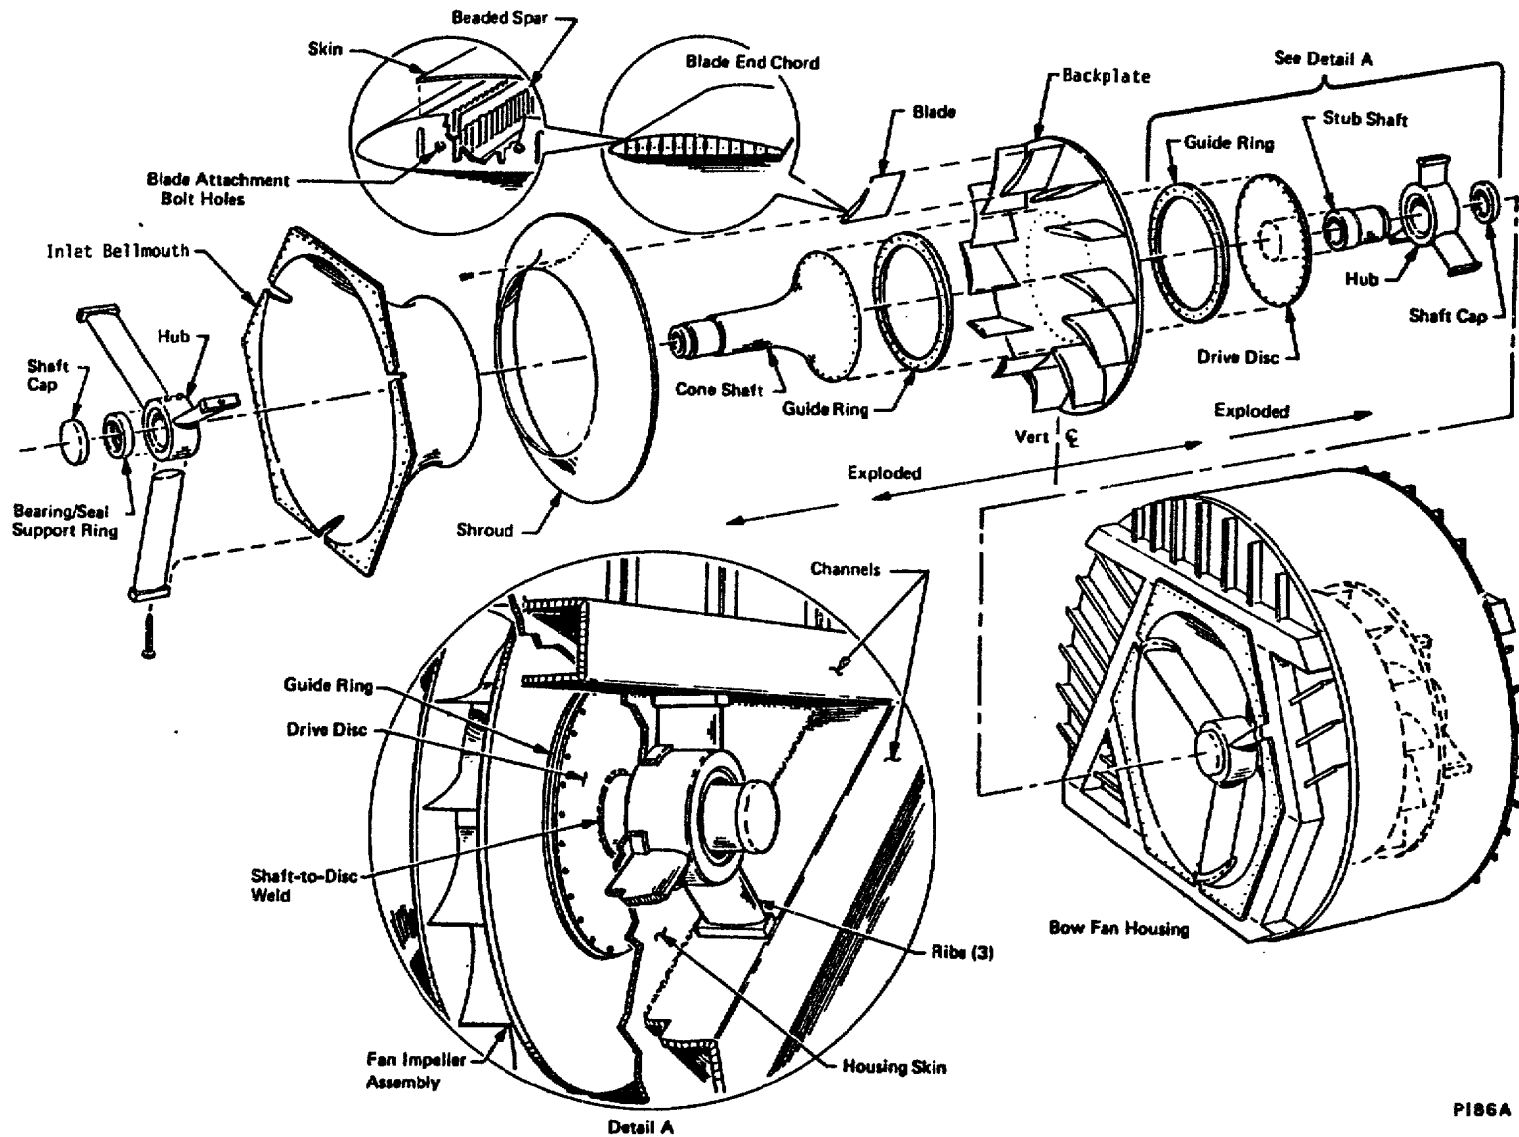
CUSHION FAN — EXPLODED VIEW
